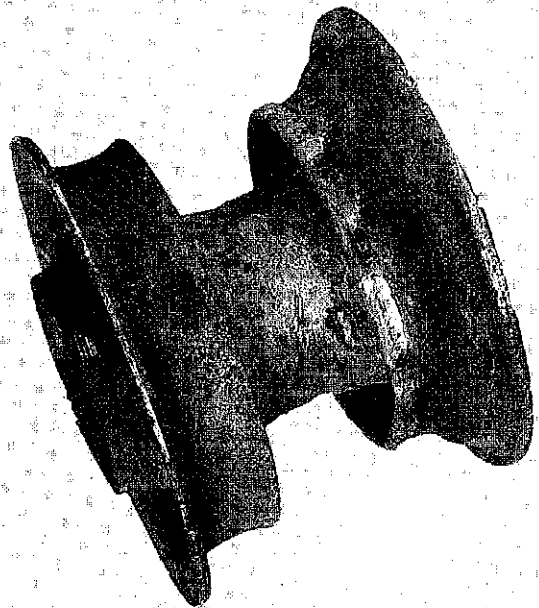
TRACK ROLLER WITH $\frac{1}{4}$ " MILD STEEL ROD WELDED ON TO THE WORN EDGE.
